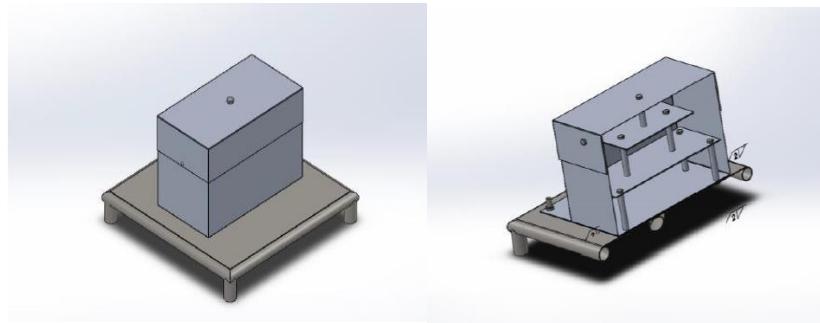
Front view of Chassis with AIP (Note: all dimensions in mm)
